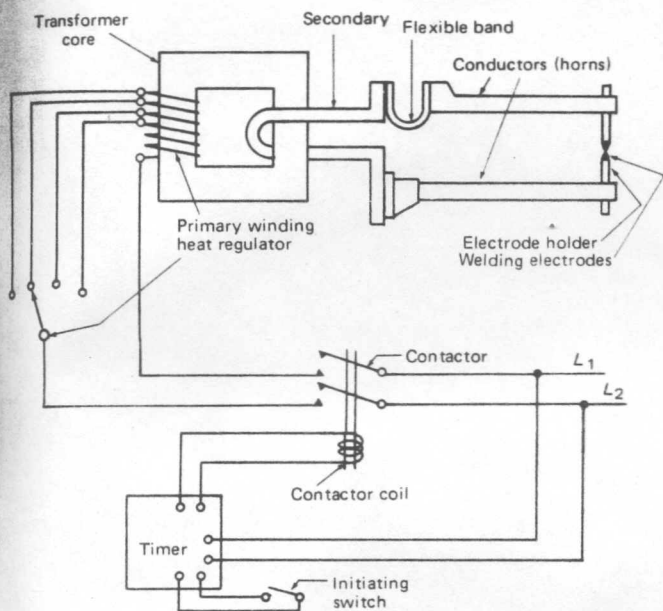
Schematic of a single-phase ac resistance-welding machine. (Redrawn from *Welding Engineering* by Boniface E. Rossi. Copyright 1954 McGraw-Hill Book Company. Used with permission of McGraw-Hill Book Company.)
